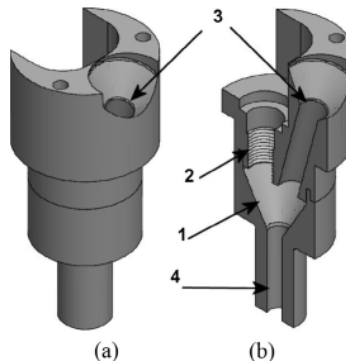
Pre-chamber 3D CAD model (a) and cross section view cut of 3D CAD model [166].
